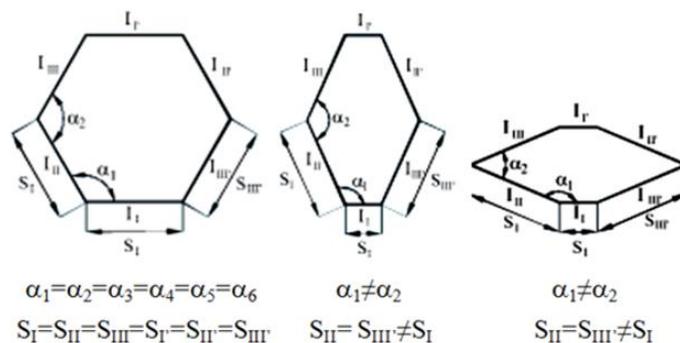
Examples of the mutual arrangement of needle combs in a six-comb warp-knitting machine
